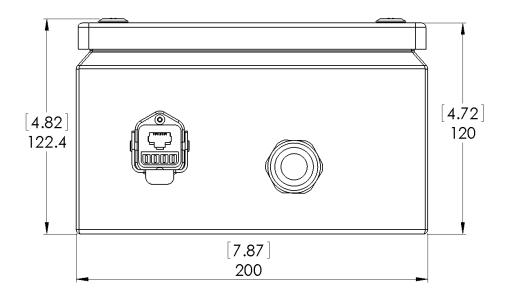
RE08 Control Enclosure Mechanical Dimensions
